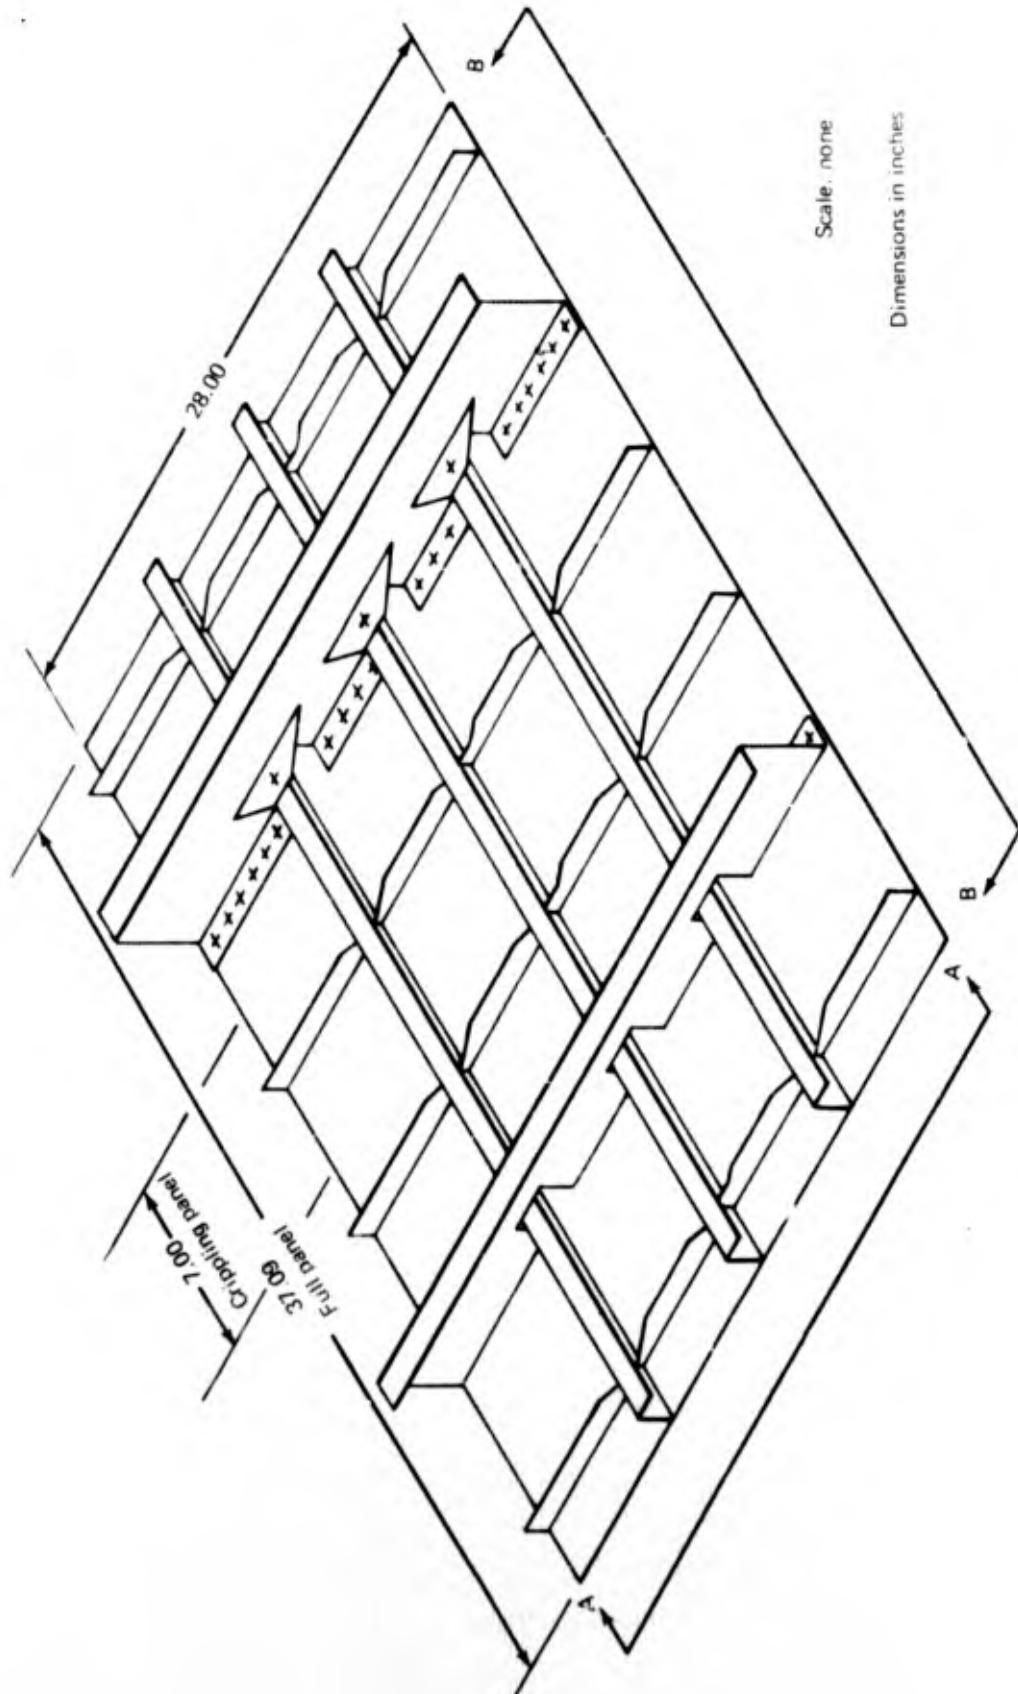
NOMINAL DIMENSIONS FOR TYPE III PANELS
